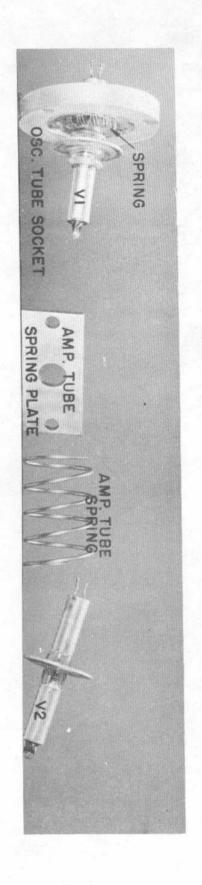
Oscillator and Amplifier Tube Socket Parts
